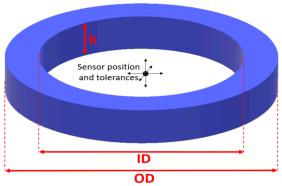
Sketch of the cylinder ring with the geometrical parameters and the sensor in its center.
